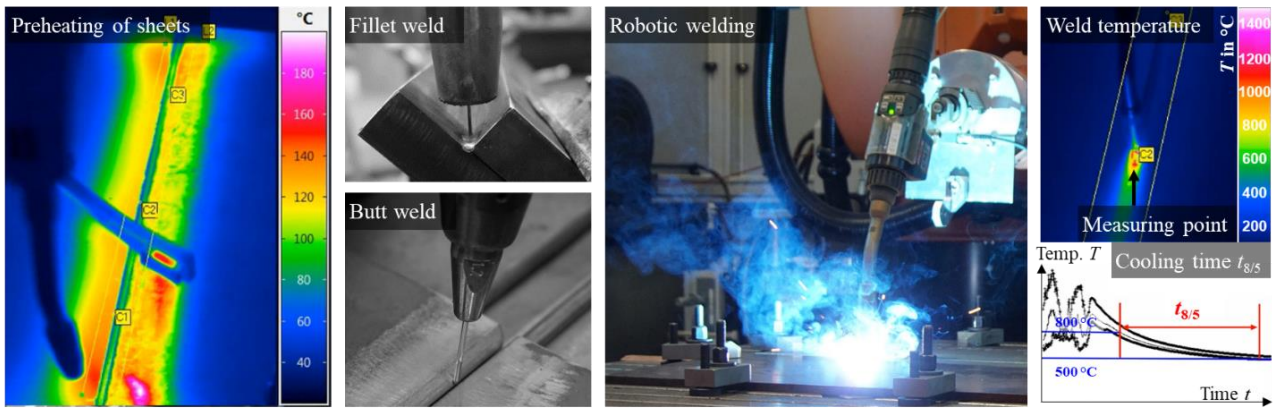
Manufacturing of welded test specimens, incl. verification of inductive preheating and determination of cooling times
